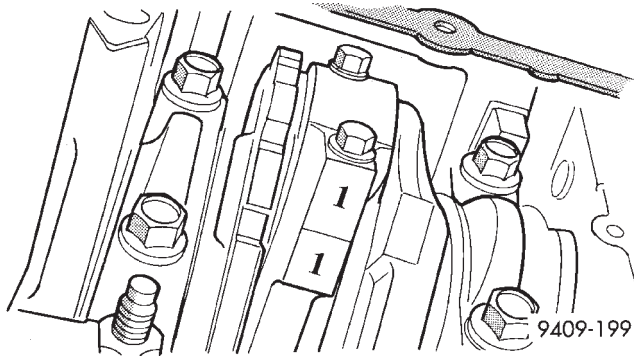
Identify Connecting Rod to Cylinder Position—Typical
